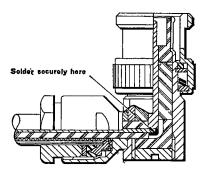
E-Assembly instructions-BNC Type plugs and sockets-Elbow plugs improved braid clamp
